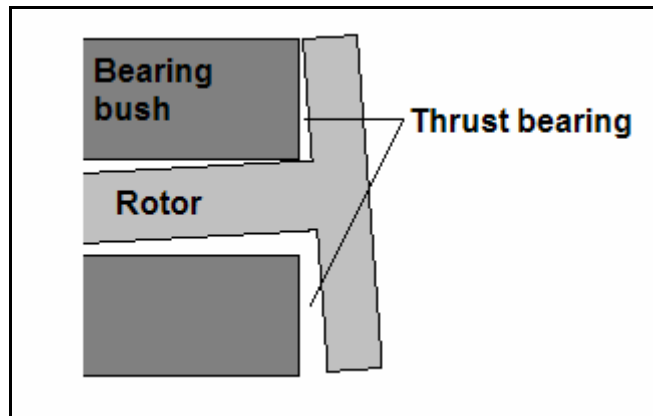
An exaggerated sketch showing that rotor contact would never be encountered with the thrust faces.
